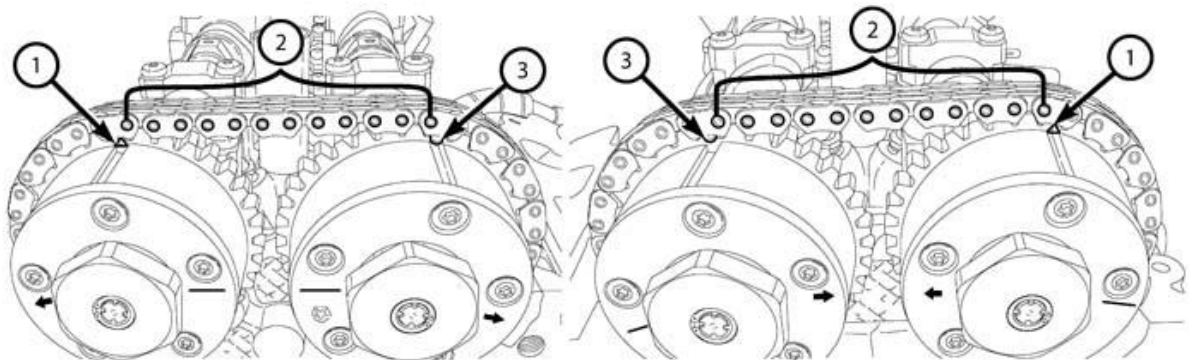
Chain Pins, Exhaust Cam Phaser Triangle Marking & Circle Marking
